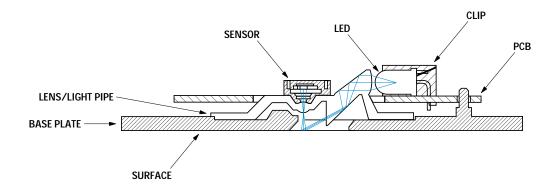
Sectional view of PCB assembly highlighting optical mouse components.
